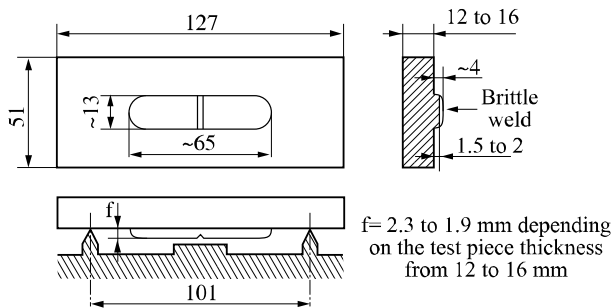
Dimensions of the Pellini test-piece; from [LEI 71]
